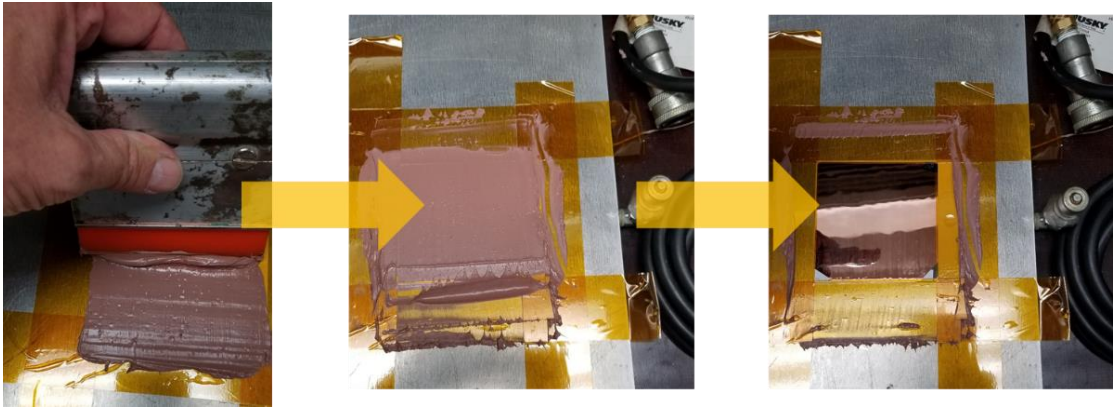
TPV paste fill process showing copper paste dispensed using squeegee followed by surface cleaning
